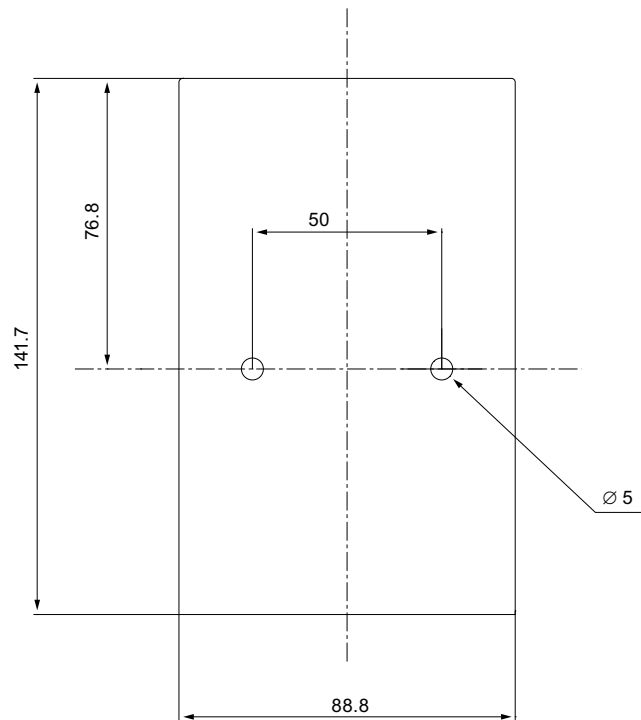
Hole drilling template: Fuse switch disconnector size 000
